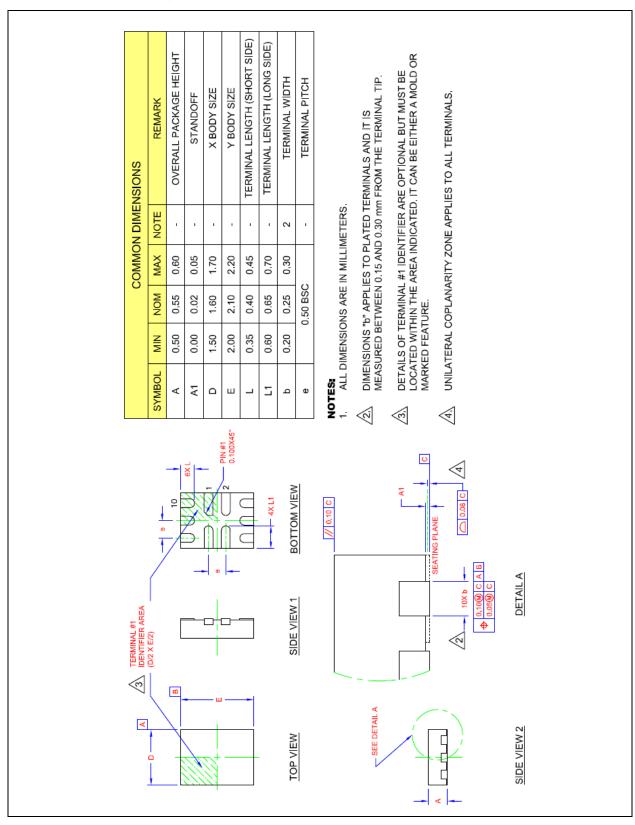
10 PIN, 1.6MM X 2.1MM QFN PACKAGE OUTLINE
